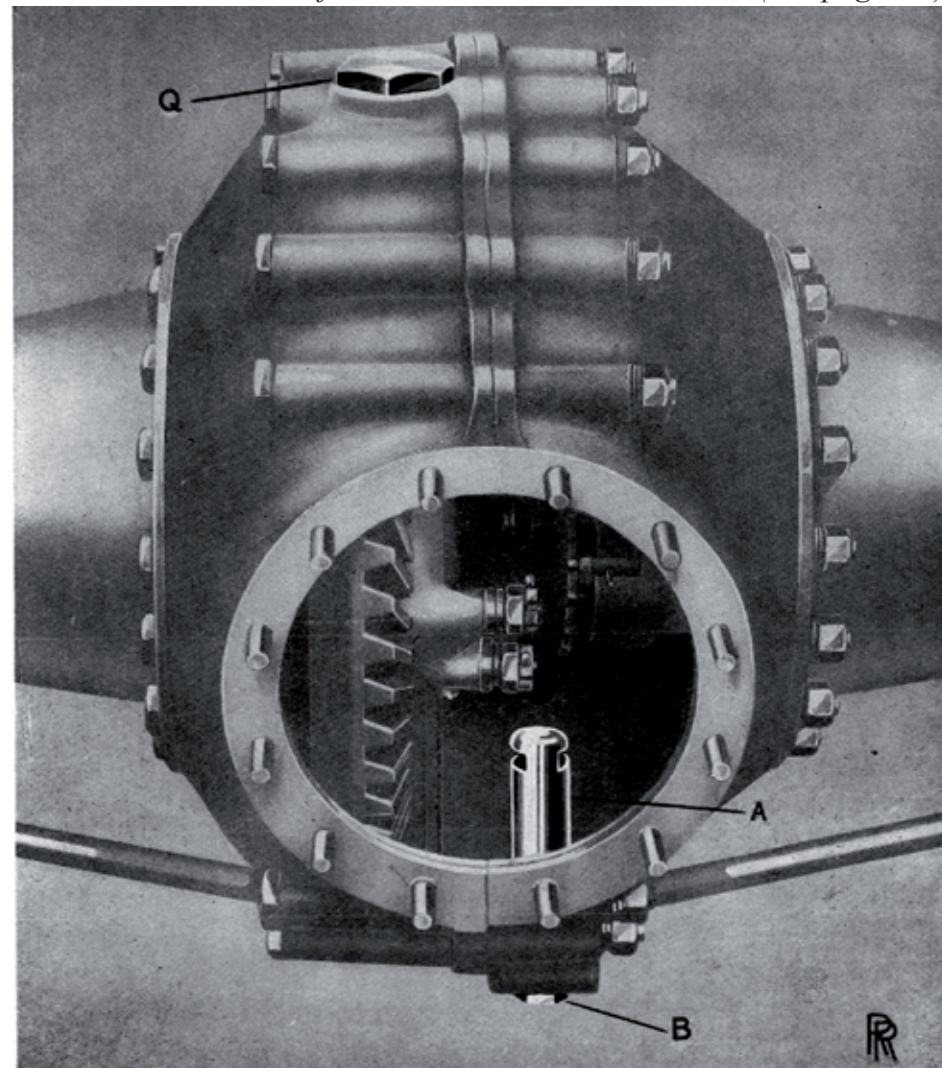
OIL PLUGS IN REAR AXLE CASING.
